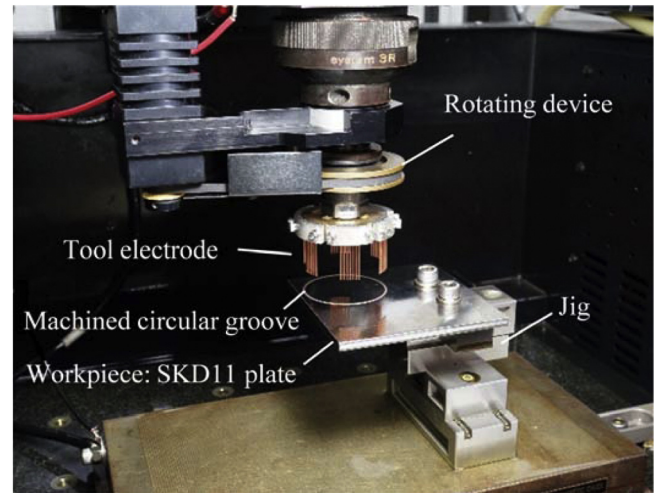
Machining example of EDM coring of steel plate (SKD11).
